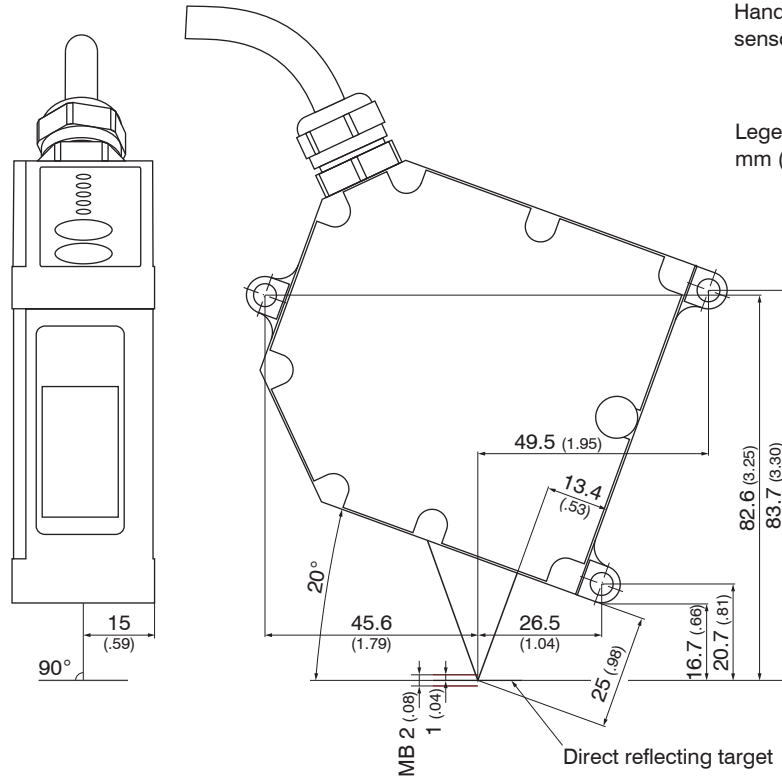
Dimensional drawings optoNCDT1700-2DR (not to scale)
